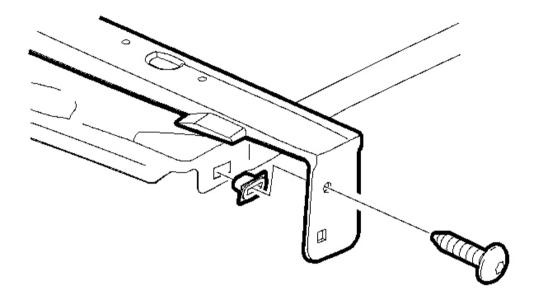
Removing/Installing Rear Mounting Screws To Luggage Carrier Courtesy of GENERAL MOTORS CORP.
